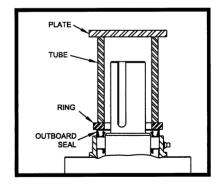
Placement of Tooling for Installation of Outboard Seal
